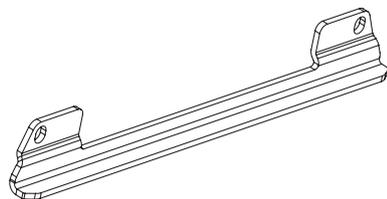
Damping element for linear modules HM-B and linear tables HT-B
